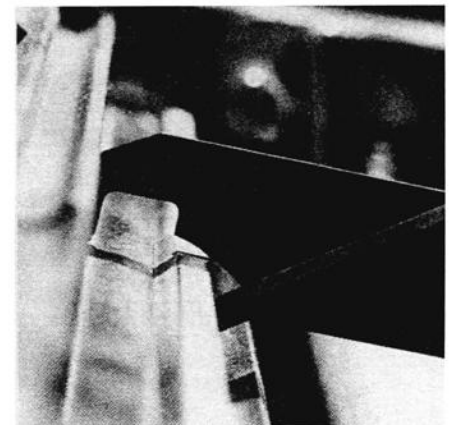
Initially, adjust the knife height so that the cutting edge almost touches the arc of the knife setting gauge, as shown. You'll need to make the final adjustment in a later step.
